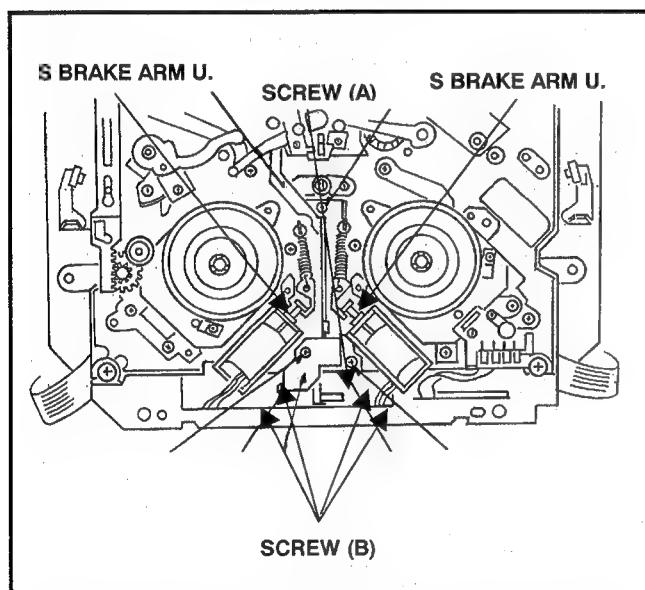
Removal of M Cassette Brake Base Unit
